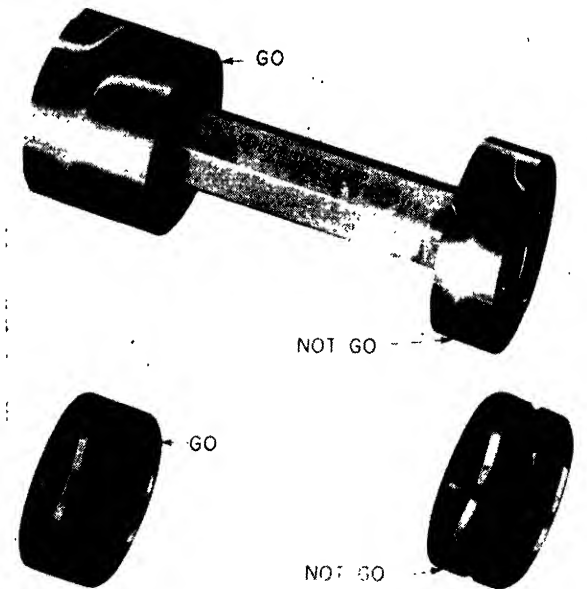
Go and not-go cylindrical plug and ring gages. (Courtesy of The Sheffield Corporation.)
